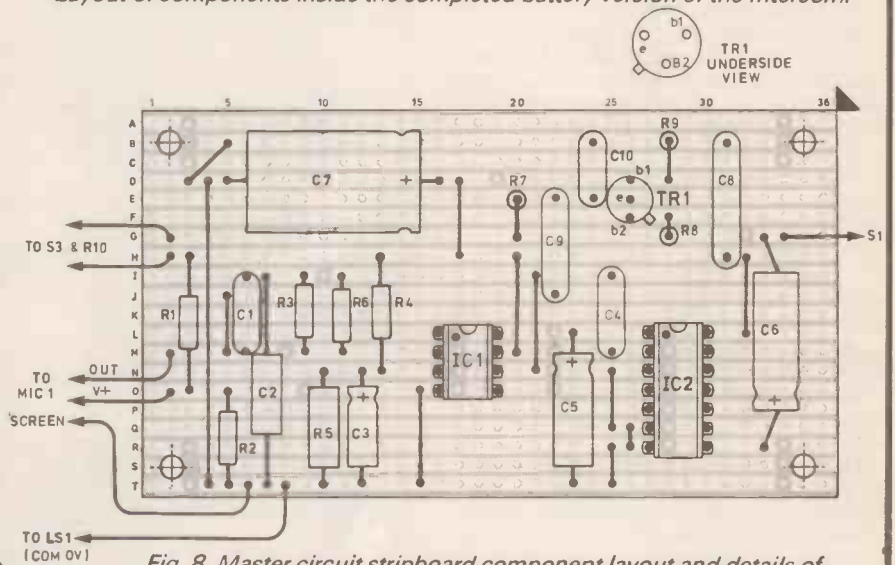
Master circuit stripboard component layout and details of breaks required in the underside copper tracks.
